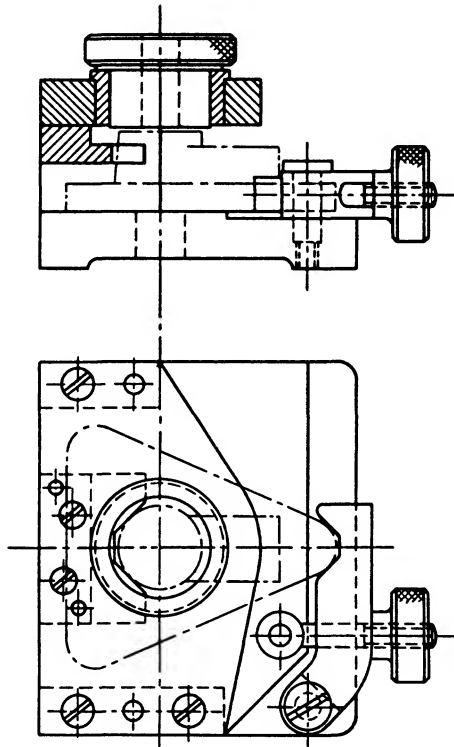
SECOND OPERATION JIG (J 2) FOR DRILLING CENTRE HOLE
